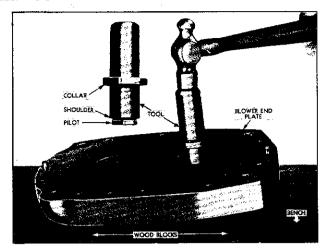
Removing Rotor Shaft Bearings, also Oil Seals from Blower End Plates.
